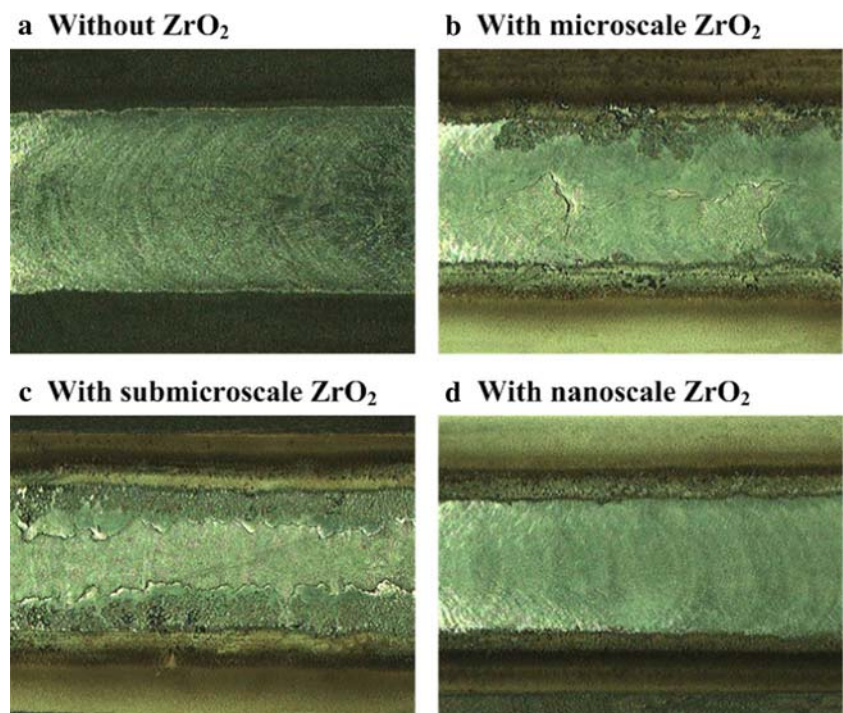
shows the surface appearance of AISI 316LN stainless steel TIG welds produced with and without ZrO₂ flux at a welding current of 200 A and at a travel speed of 150 mm/min. No undercutting formed at the toe of the weld. Figure 2a shows the results of TIG welding without ZrO₂ flux, which created a metallic surface of AISI 316LN stainless steel weld. A large amount of slag was produced with the use of microscale ZrO₂ flux (Fig. 2b). In contrast, a small amount of slag
